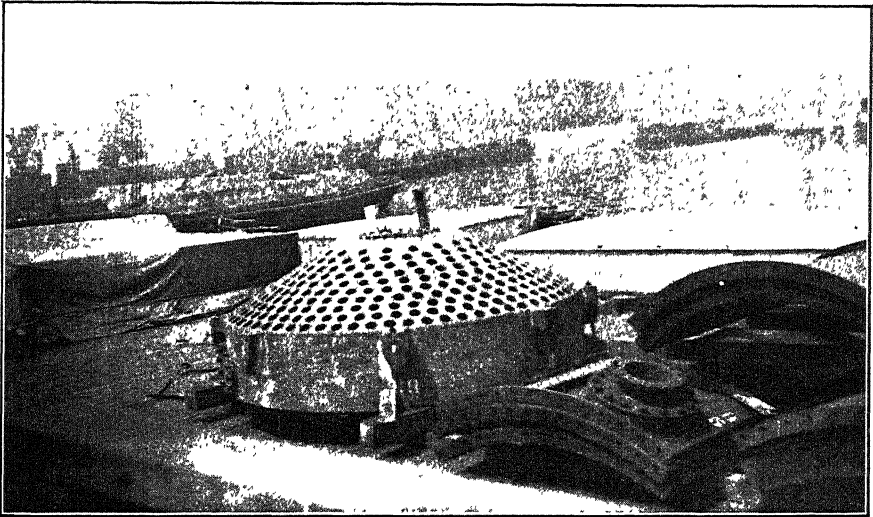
Parts of a 10 ft. 6 in. diam. calandria vacuum pan. Calandria of cast brass, 10 ft. 0 in. diam., weighing 9000 lb., with tubes expanded-in.
